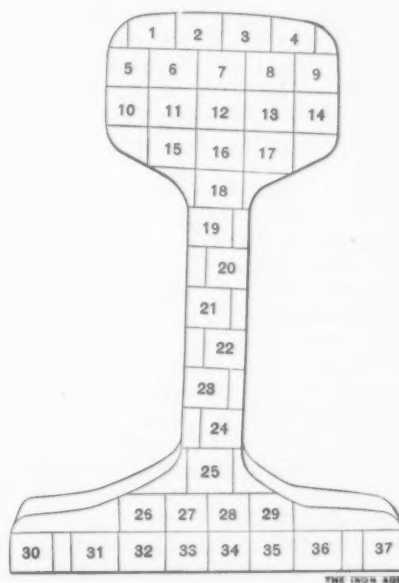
A Steel Rail Section Cut Into Small Pieces for Fremont Tests.
